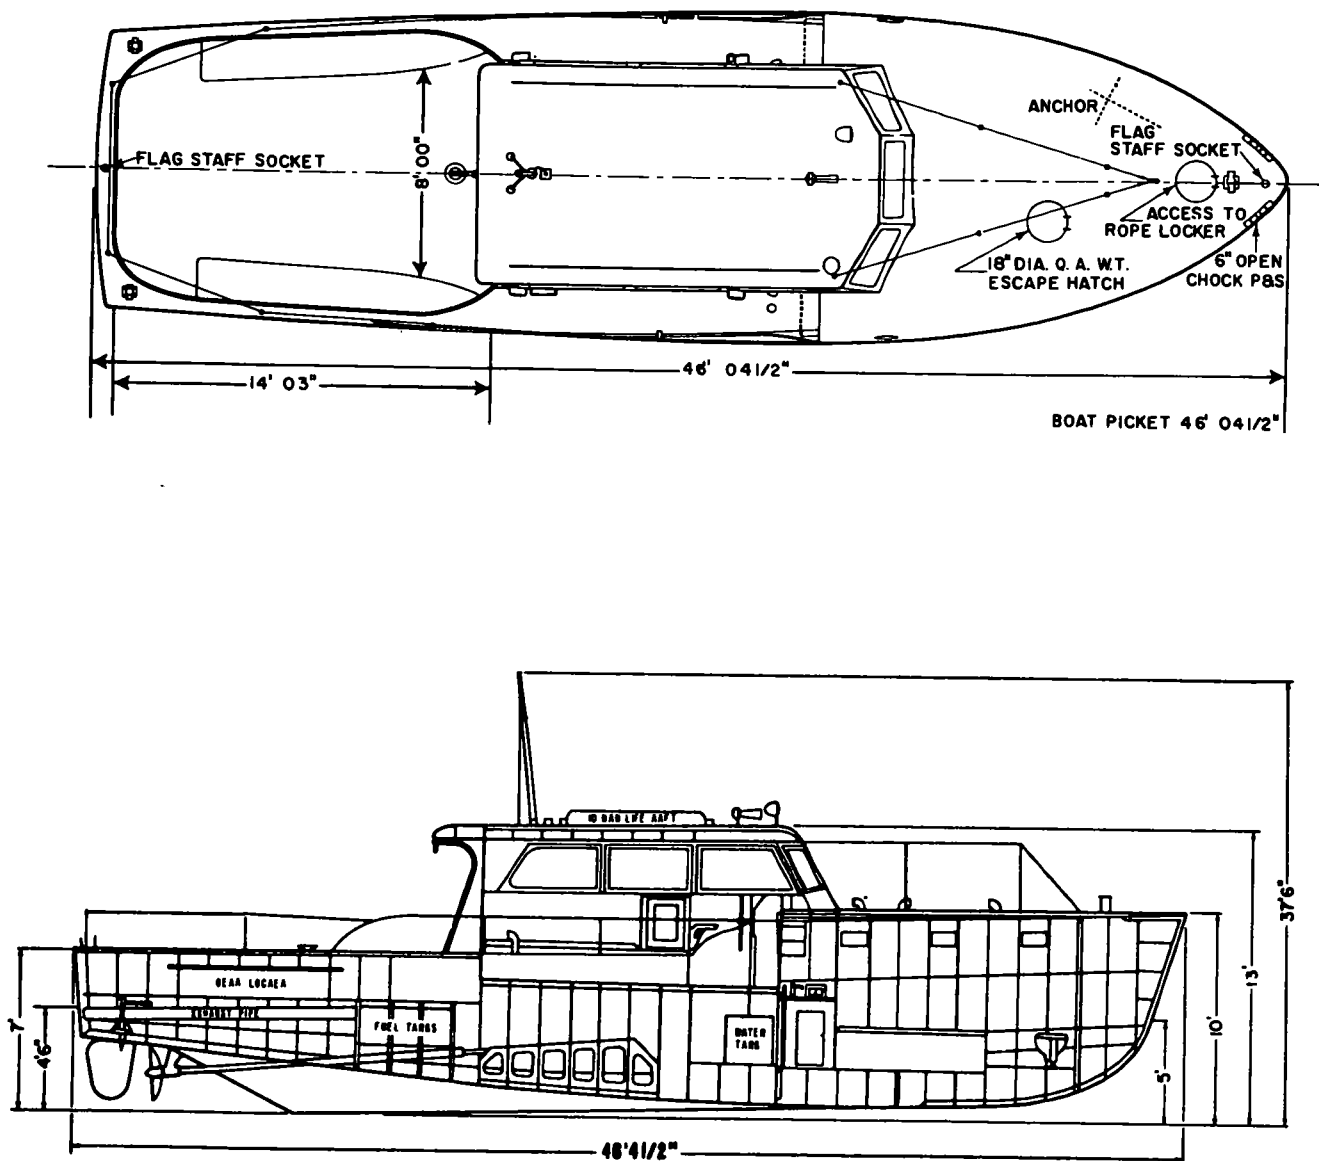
Boat, picket, steel, 46 feet 4½ inches design 4003.
